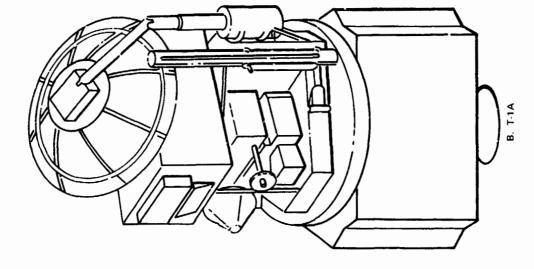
EXPLODED VIEW-T-1A
